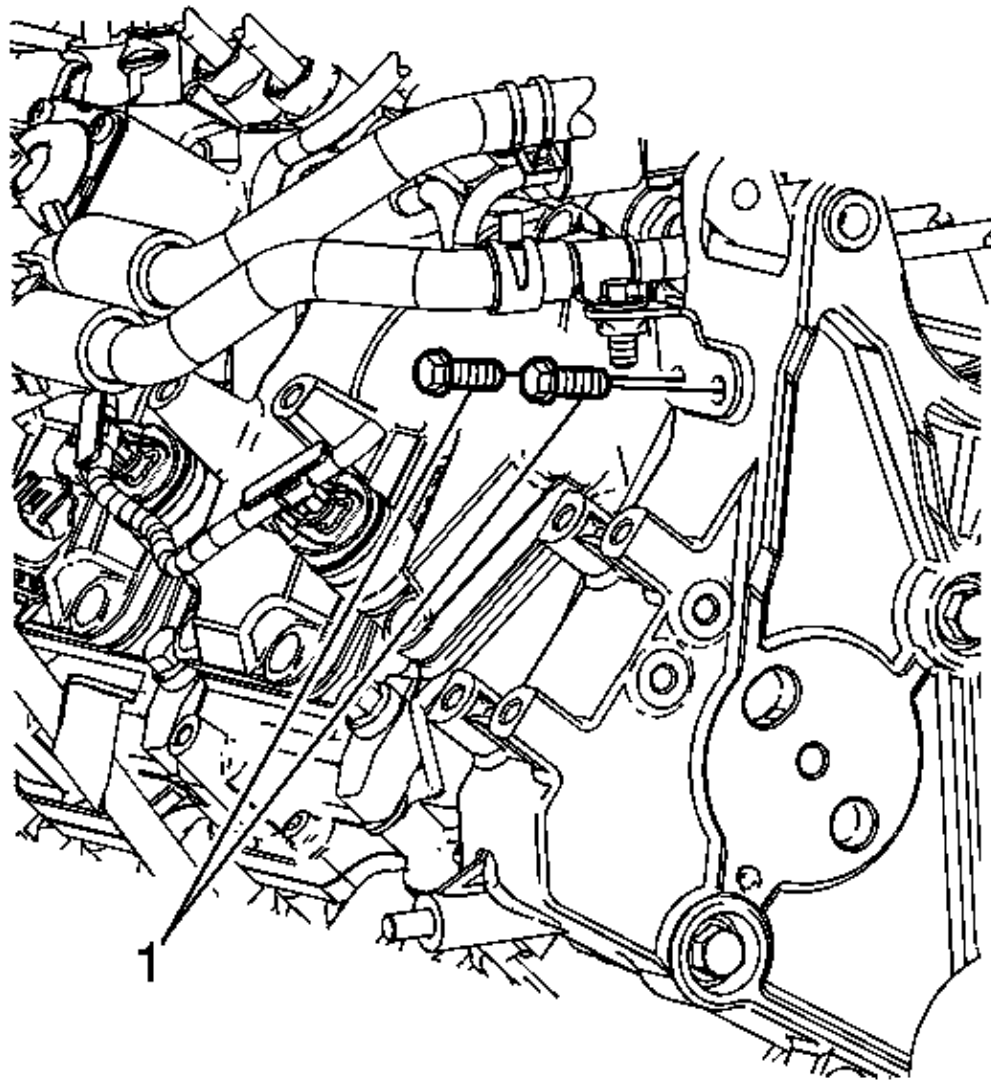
View Of Fuel Feed Pipe Bracket Bolts
